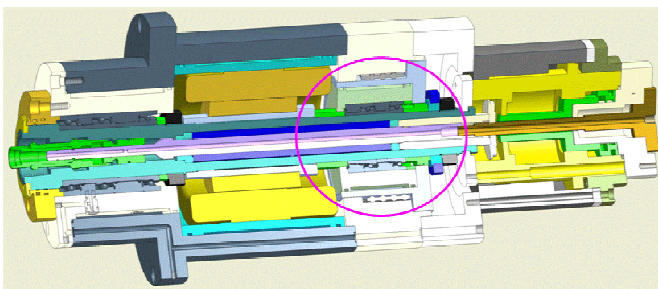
Ball Bush Type Preload Units of Main Spindle's Bearing
